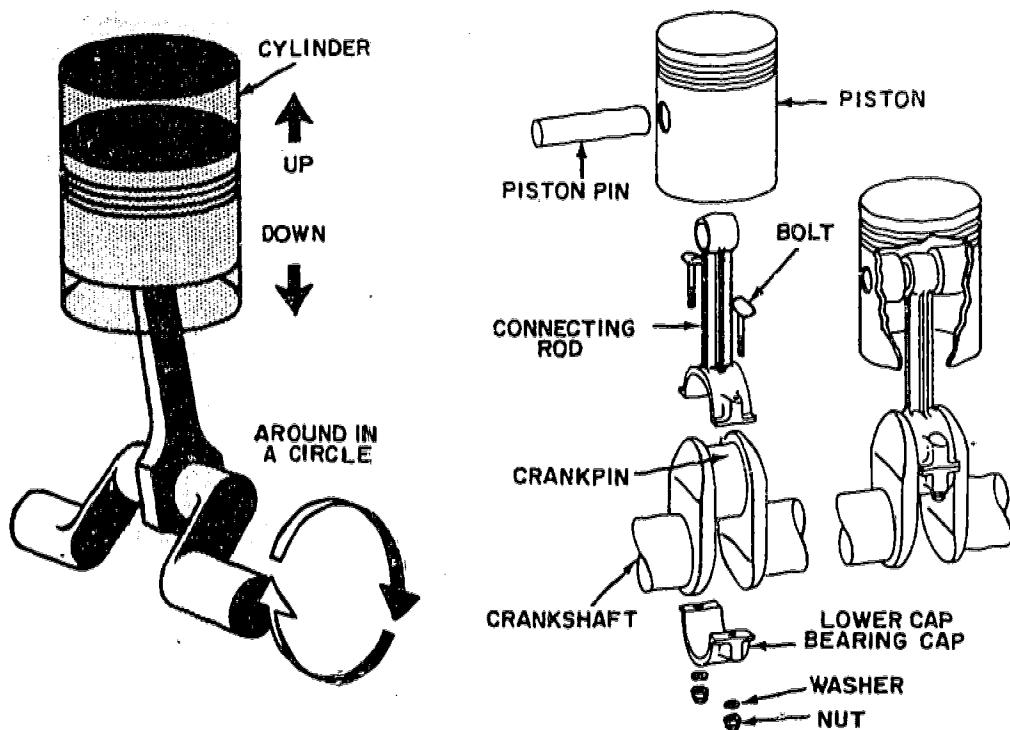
Cylinder, piston, connecting rod, and crankshaft for 1-cylinder engine.
